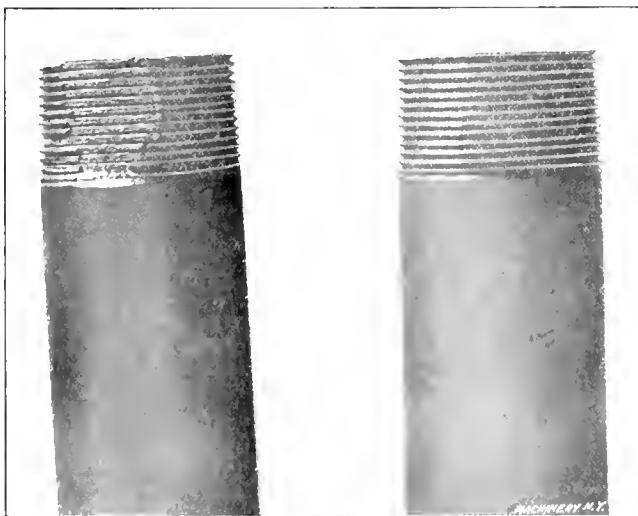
Left-hand Pipe Thread cut with Lard Oil and Right-hand Thread with "Aquadag" using same Die
